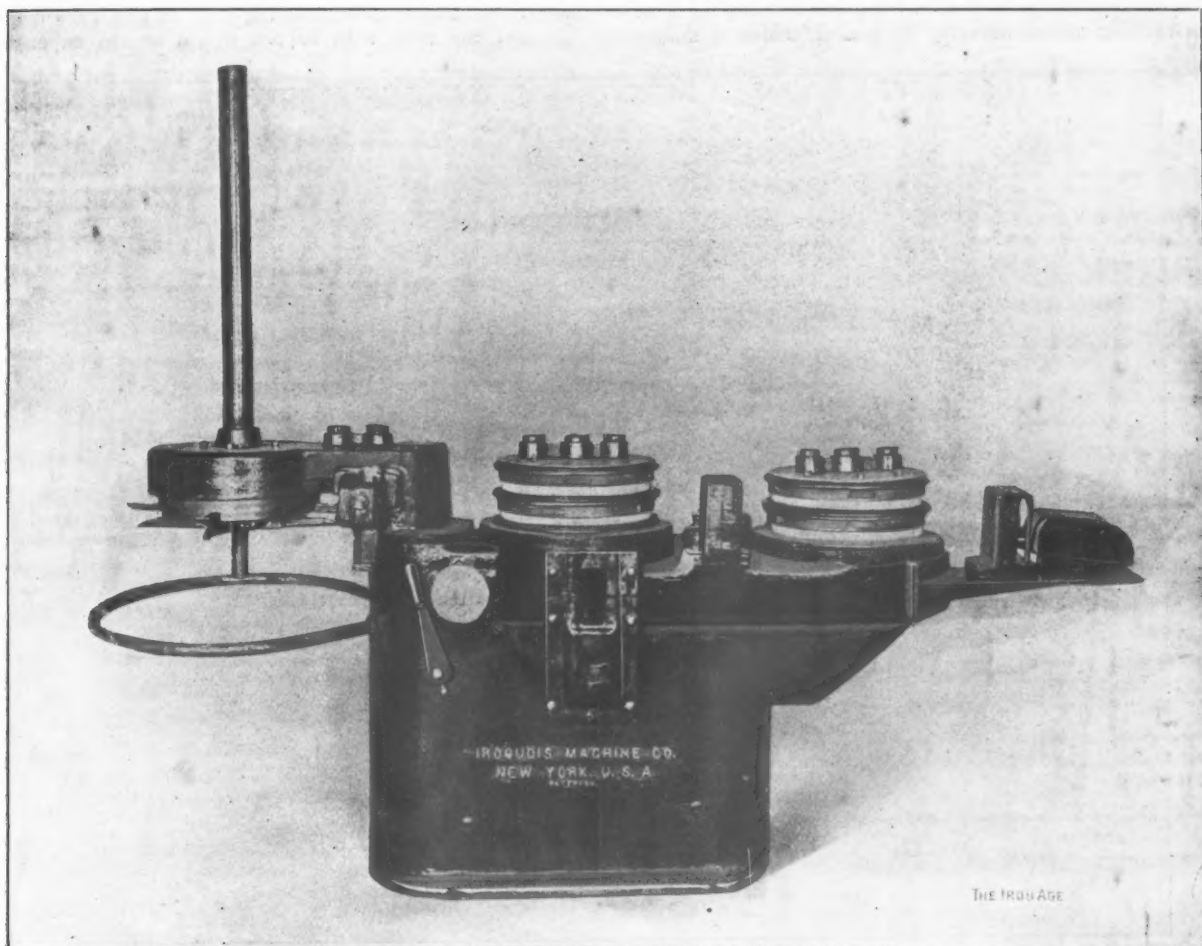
The No. 2 Multiple Die Machine, for Reducing No. 5 Rod to Nos. 10 to 15 Wire.—The Wire Is Drawn Dry on This Machine.
